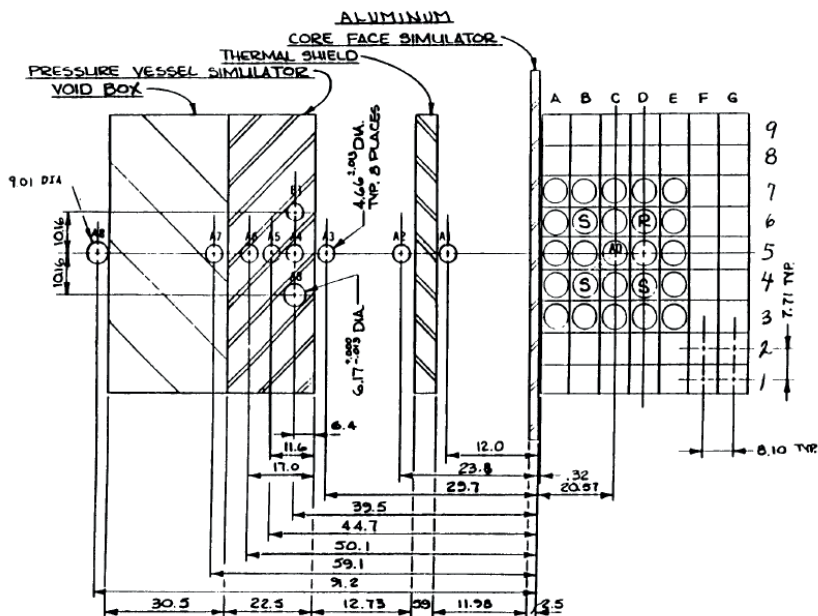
Horizontal cross section of the PCA pressure vessel benchmark facility "12/13" [2]
